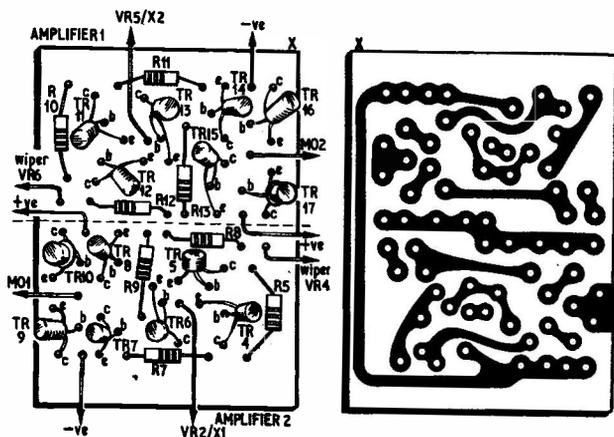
Layout and wiring of the servo amplifier board. The board is shown full size
